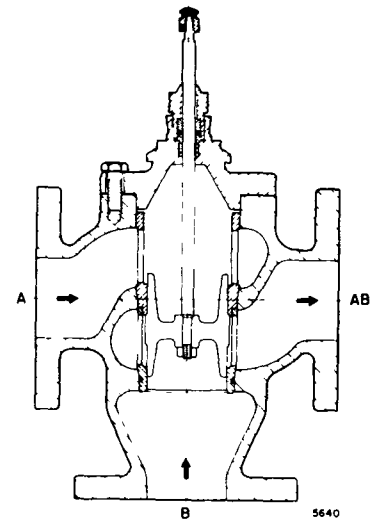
Cutaway of Typical V5013B and D Flanged Type Mixing Valve Body
